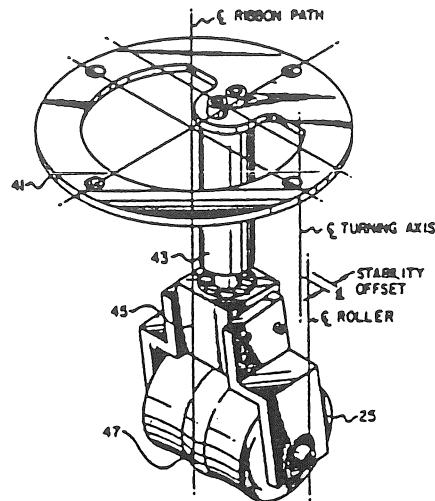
Roller head assembly of the General Dynamics tape winding machine [46]
